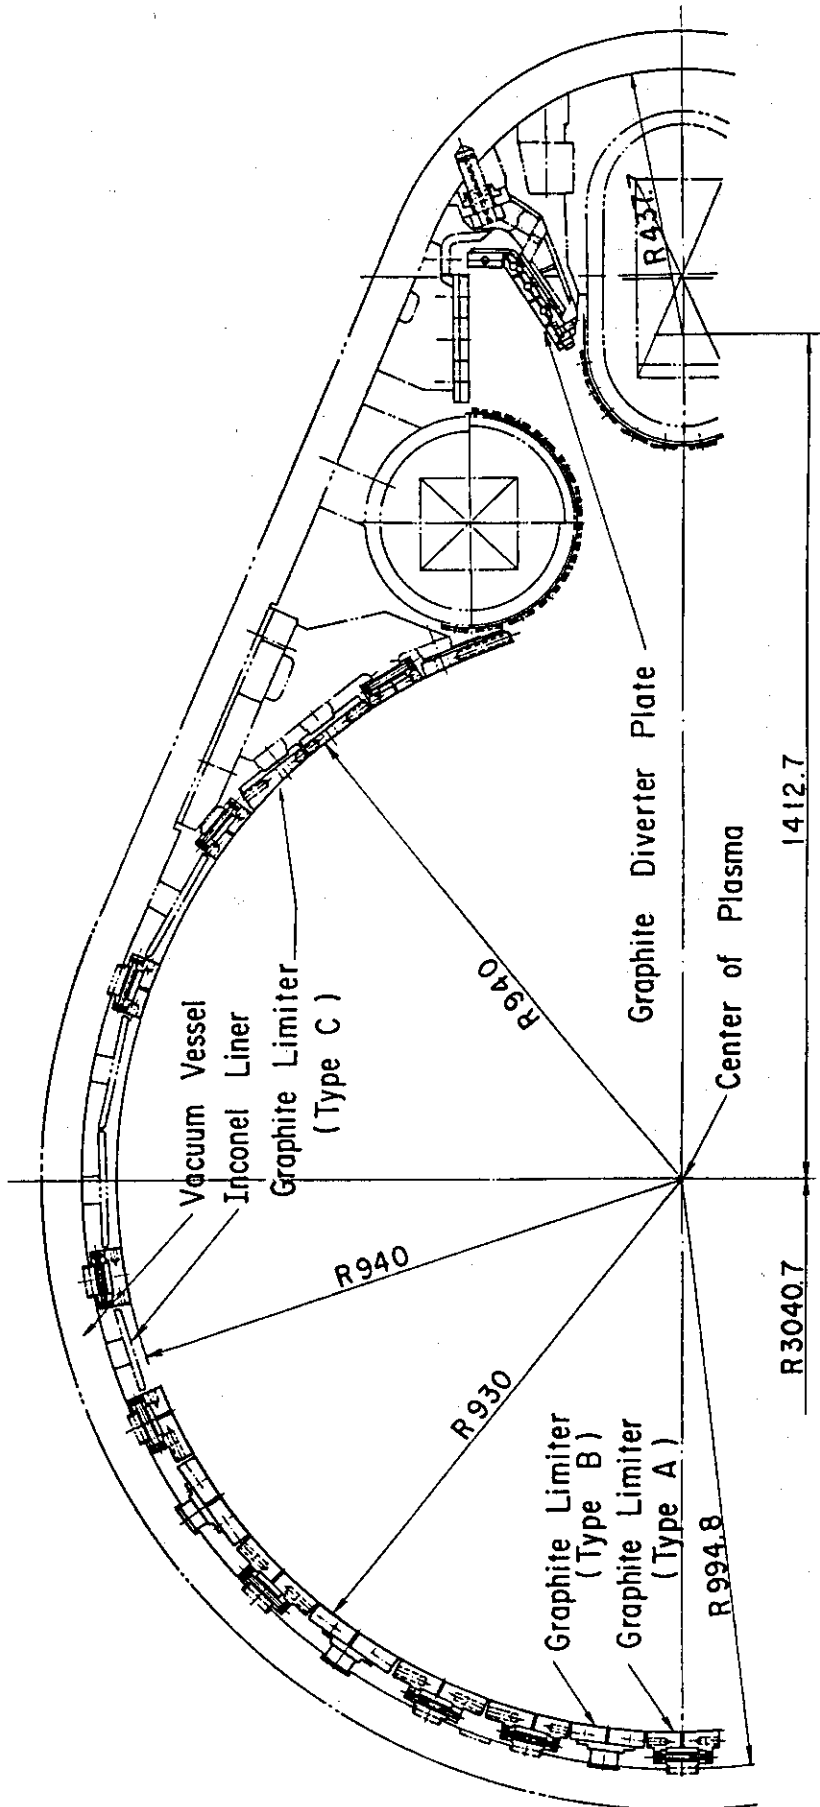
Cross sectional view of the JT-60 vacuum vessel.
